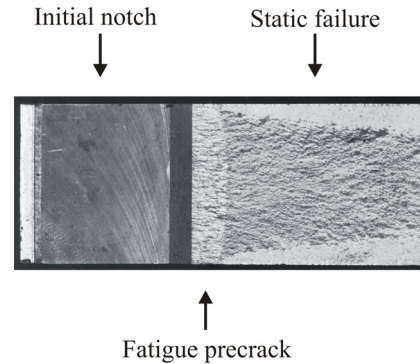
Fracture surface of 19 mm thick aluminium alloy fracture toughness test piece.
